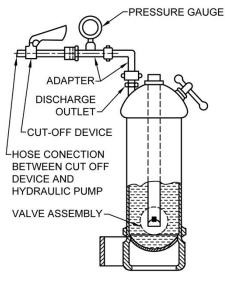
VALVE ASSEMBLY LEAKAGE TEST
